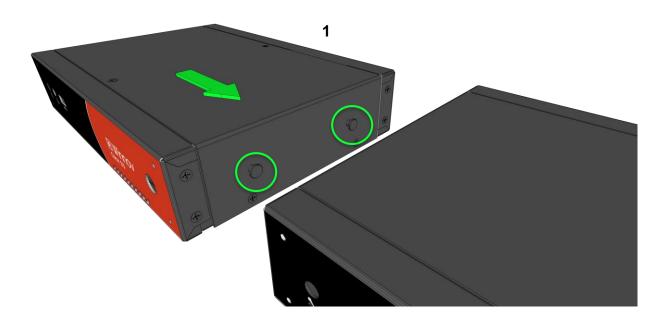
Cbox L3/S3 - Lock Bracket - Identify Standoff Screws
